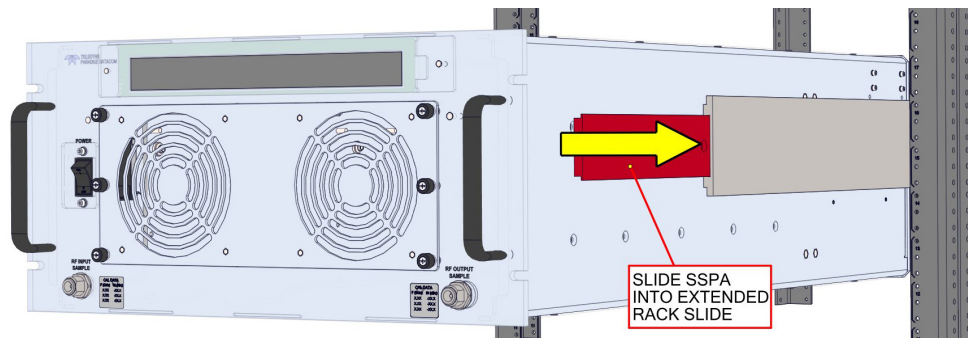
Install SSPA into Rack Slide (5RU SSPA Shown)
